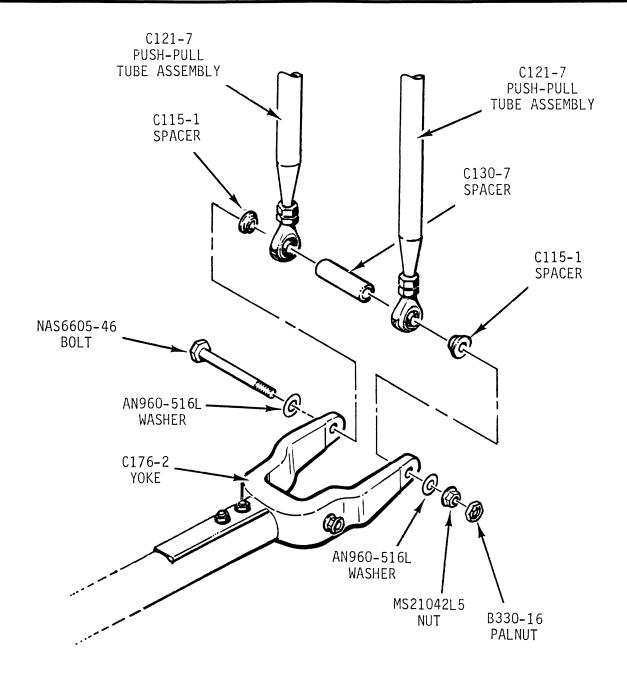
E C121-7 PUSH-PULL TUBE ASSEMBLY INSTALLATION
